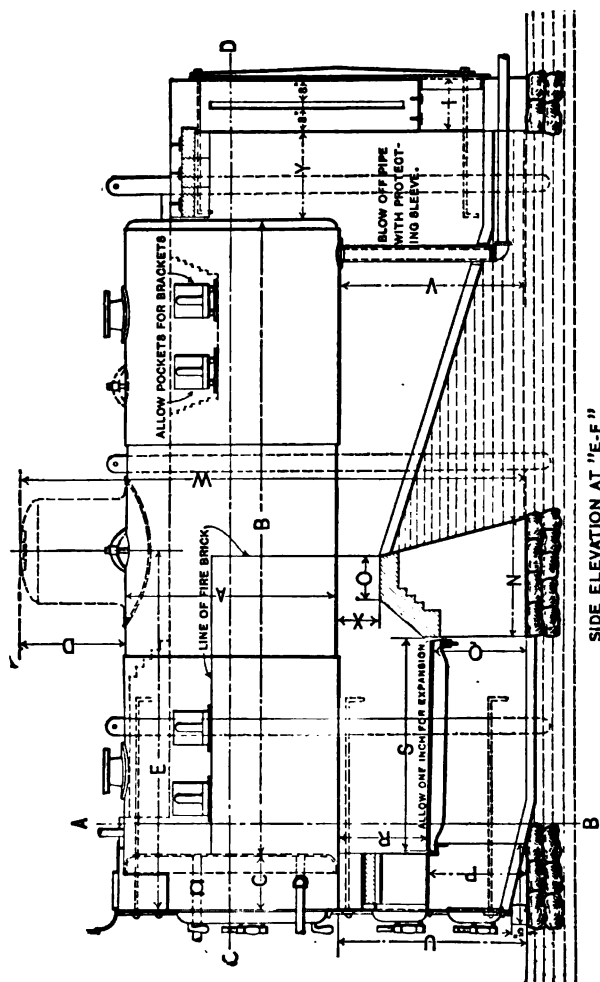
Art. 558 — Horizontal Tubular Boiler. (The Bigelow Company.)
